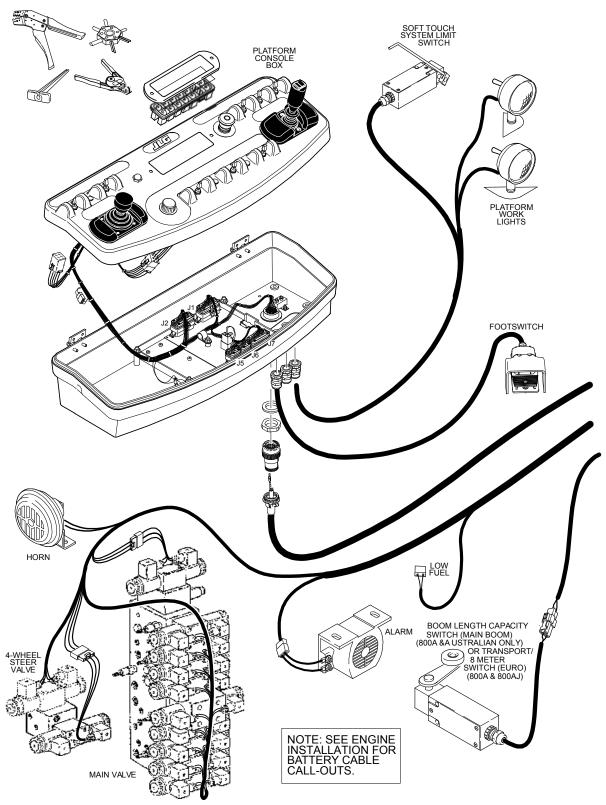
Electrical Components Installation (S/N 0300064432 to S/N 0300069000) - Sheet 1 of 2
